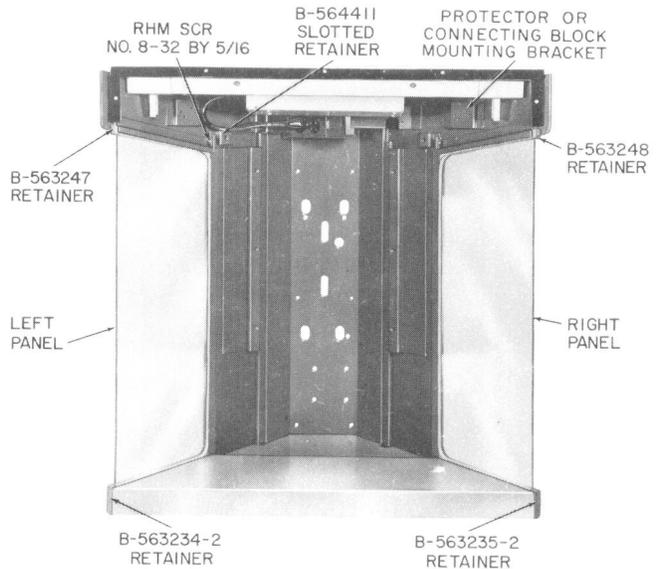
KS-19426, L1 Housing Showing Installation of Panels
